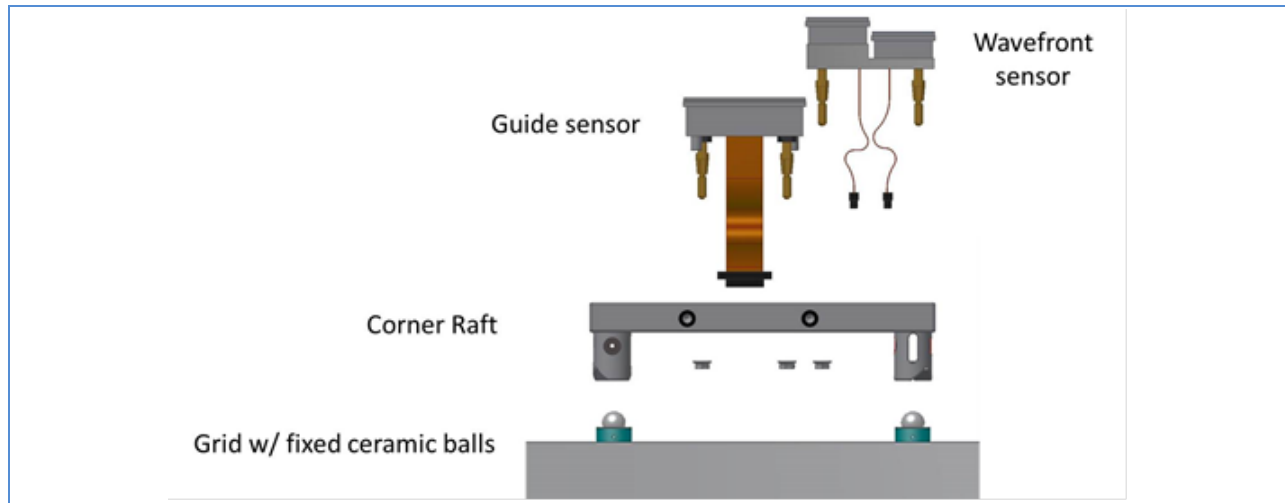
Side view of sensor-to-corner raft-to-grid mounting scheme
